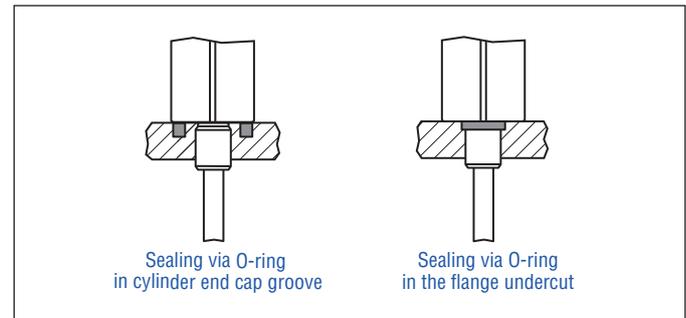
Possibilities of sealing for threaded flange with flat-face
